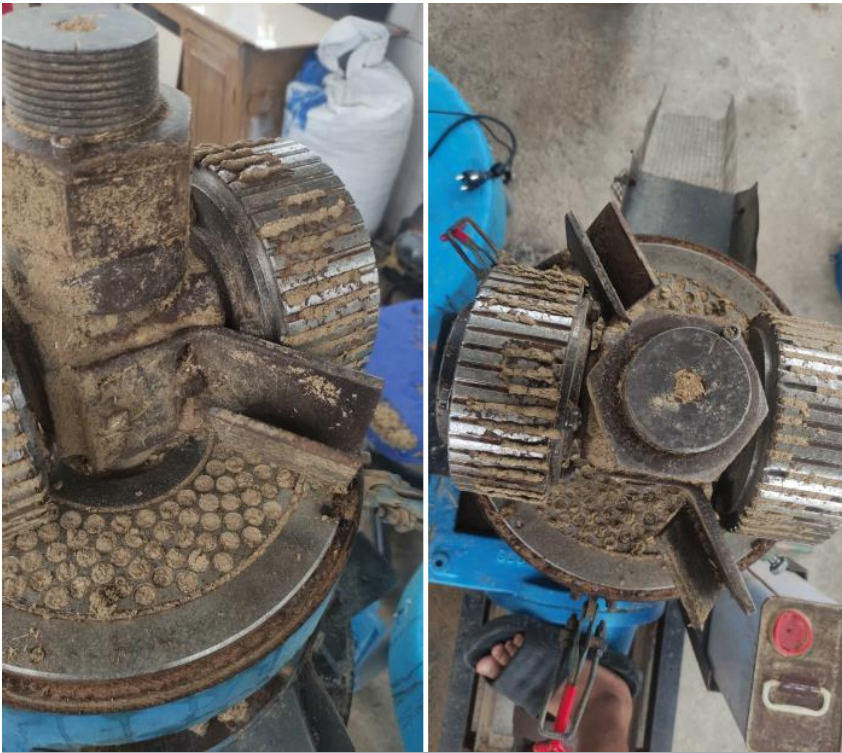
Modification and testing process of biopellet pelleting using a vertical pelletiser
